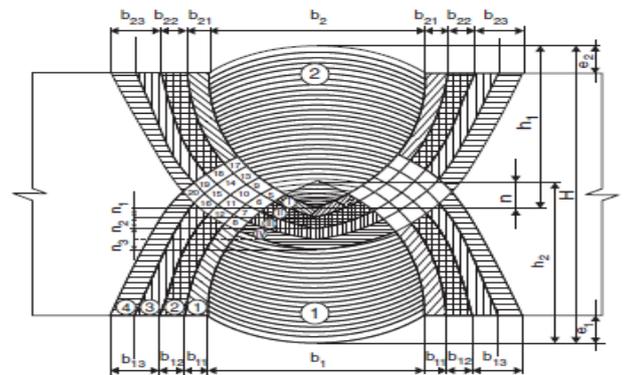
Schematic illustrating of metallographic specimens for geometrical dimensions measuring
